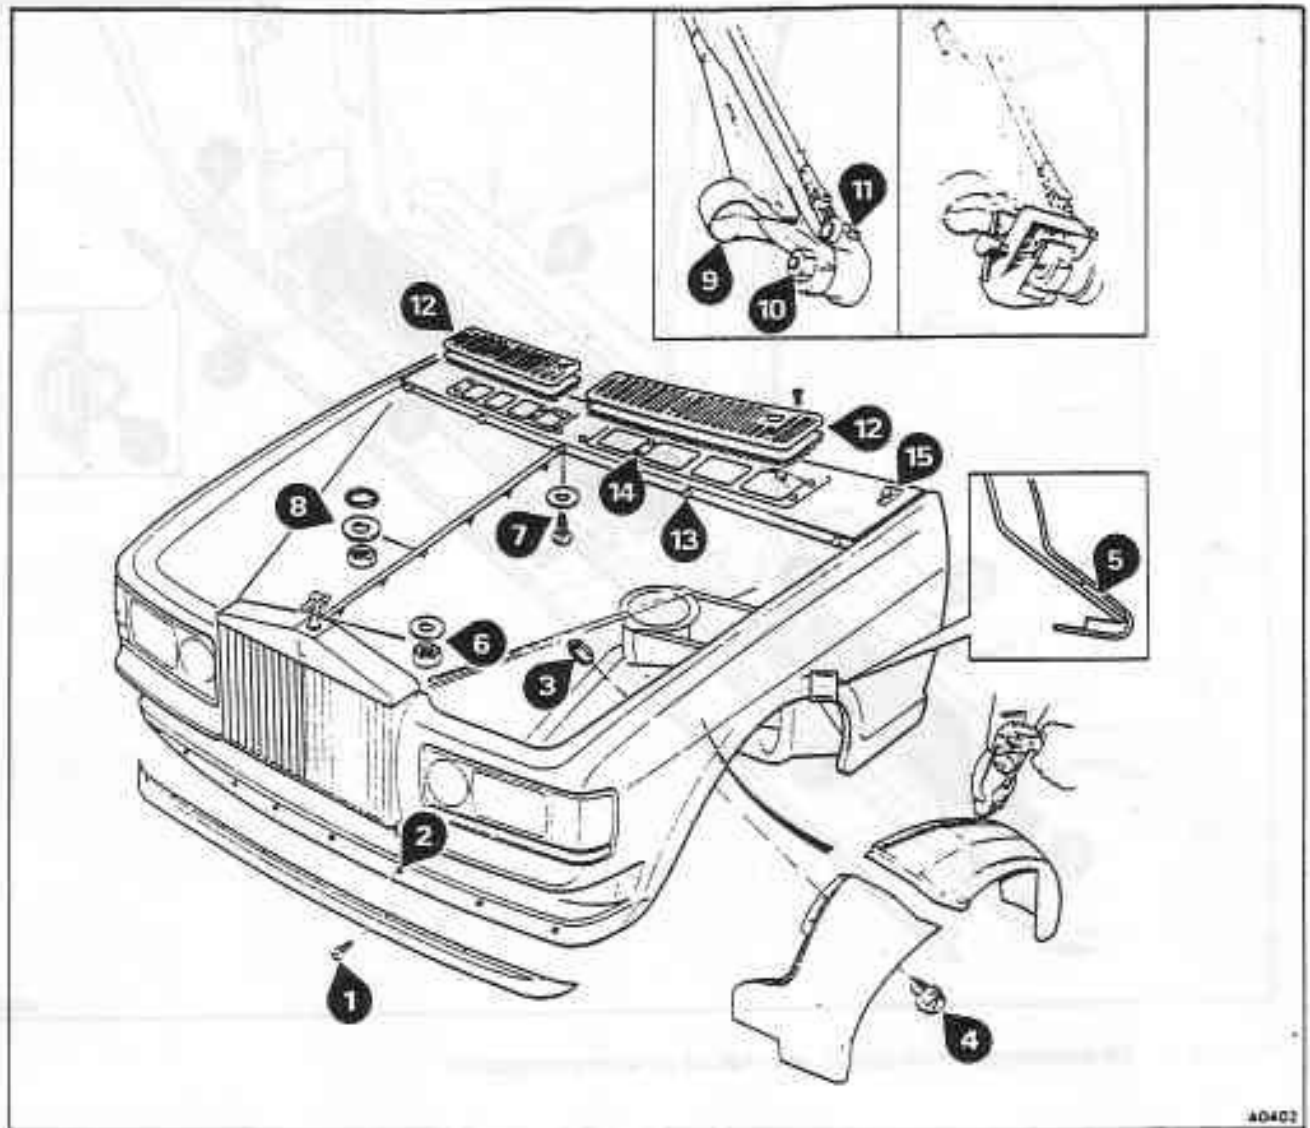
Air deflector, front wing undersheets, bonnet moulding, and air intake panels
